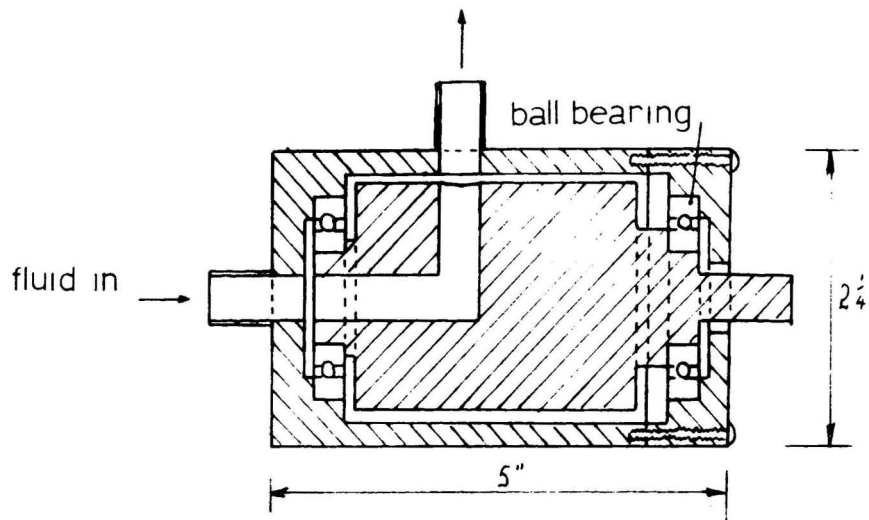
SECTIONAL VIEW OF ROTARY VALVE
